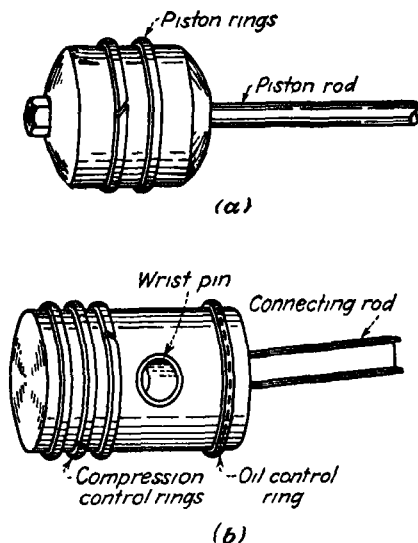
Pistons and piston rings (a) Double-acting air-compressor piston (b) Single-acting combustion-engine piston
